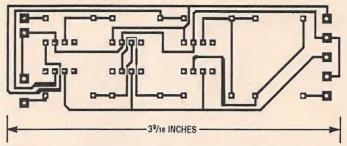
When preparing the printed-circuit board for the Subliminal Tape Mixer, remember that you'll need to duplicate the printed-circuit pattern shown here twice... either on two separate boards or on a single board as the author did.
